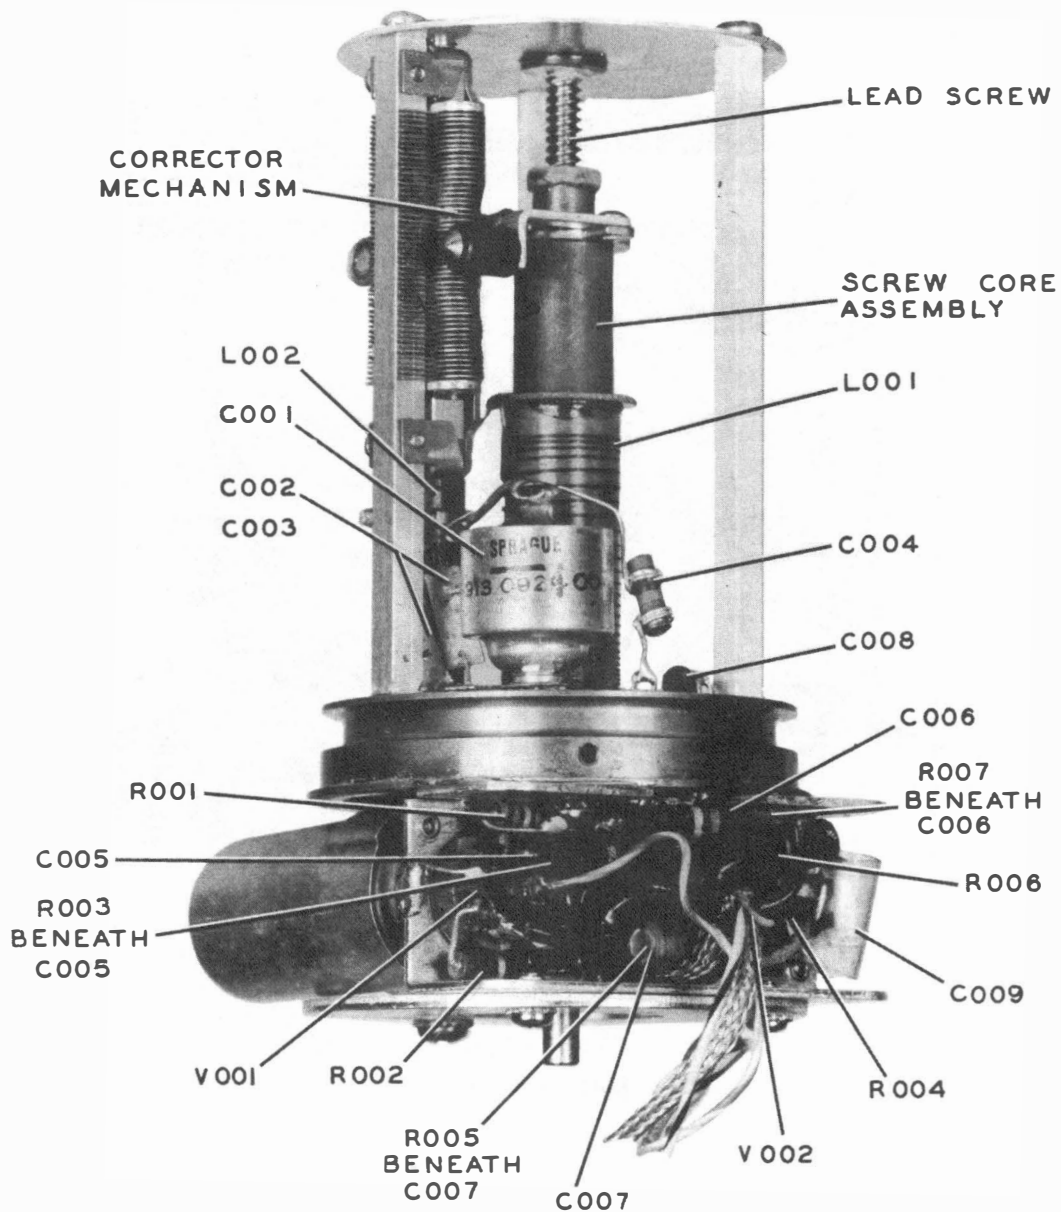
Variable Frequency Oscillator, Cover and Shield Removed
